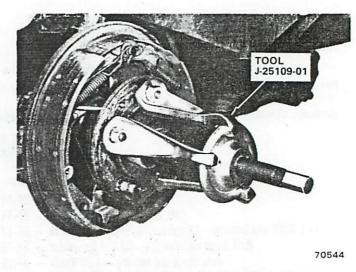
F-18 Axie Hub Removal—CJ and Scrambler Axie
